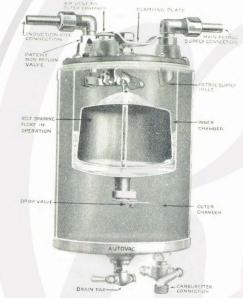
A View of the Autovac Petrol Tank as Fitted to the 14 h.p. "Standard" Car.
